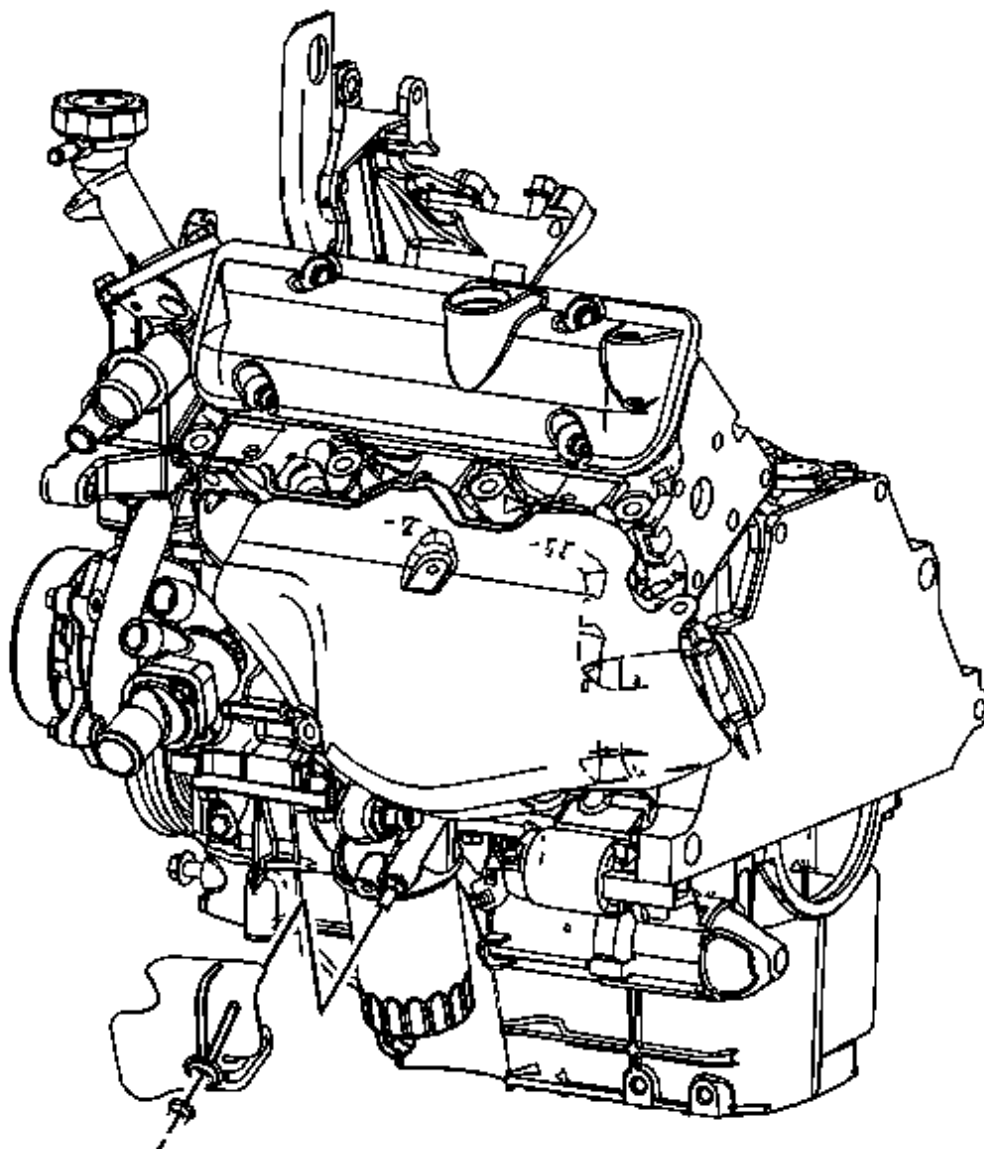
Locating Oil Pressure Sensor Heat Shield & Nut
